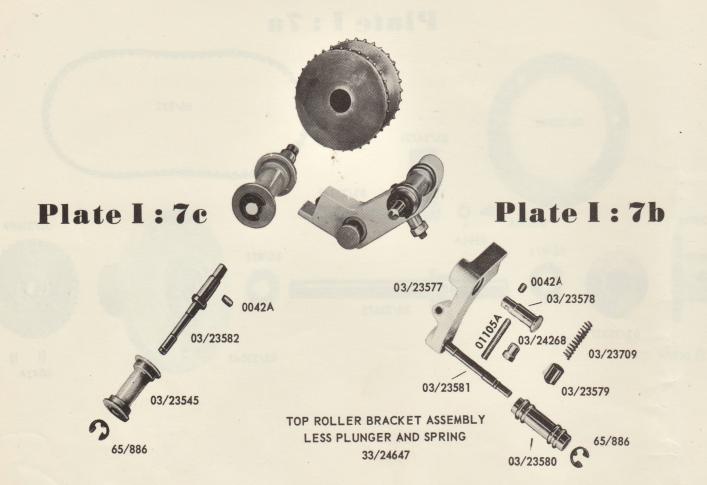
ROLLER BRACKET ASSEMBLY (Less post)
